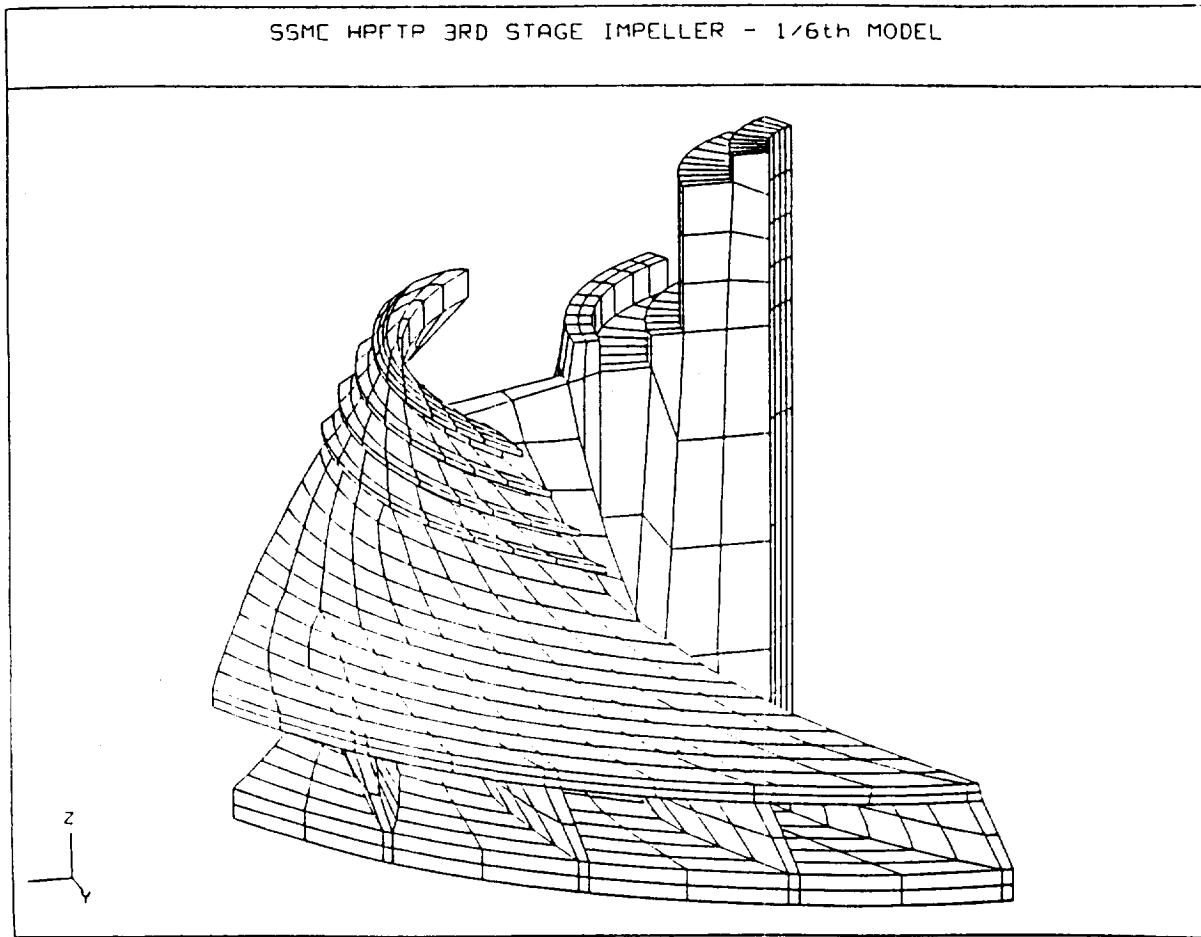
Lockheed DIAL HPFTP Impeller Model – Isometric View
